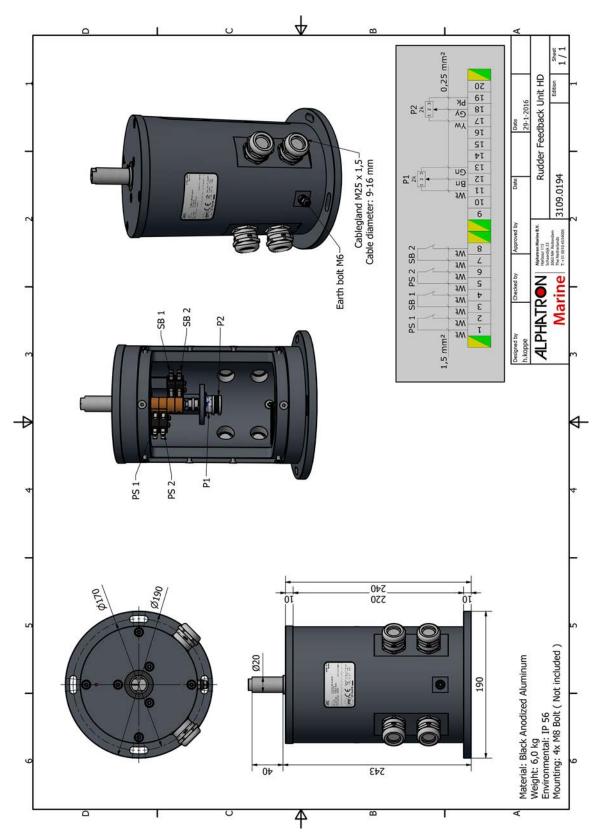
Mechanical Drawing Rudder Feedback Unit HD
